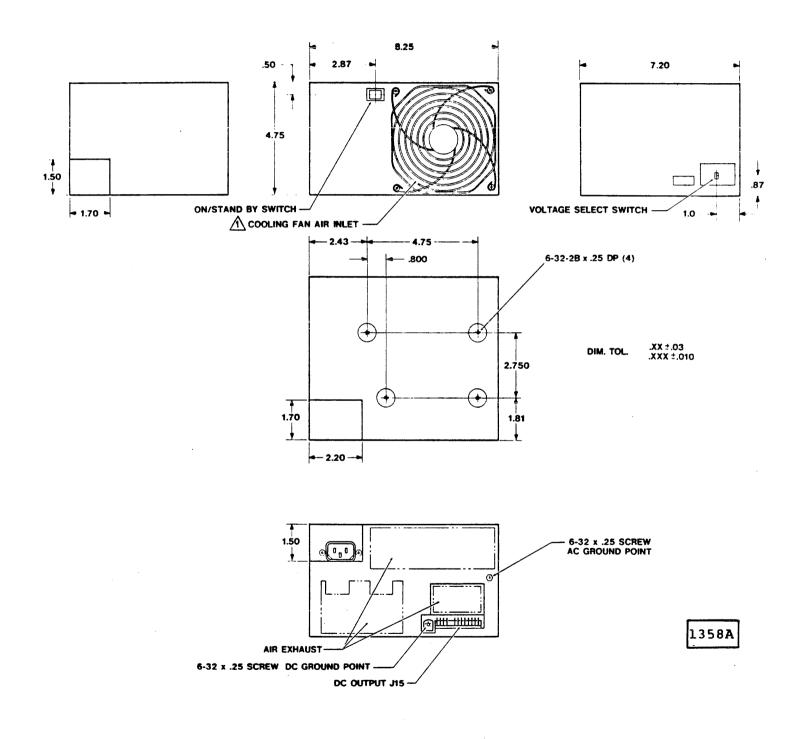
CRITICAL DIMENSIONS OF THE SABRE AND FAN MOUNTING KIT
